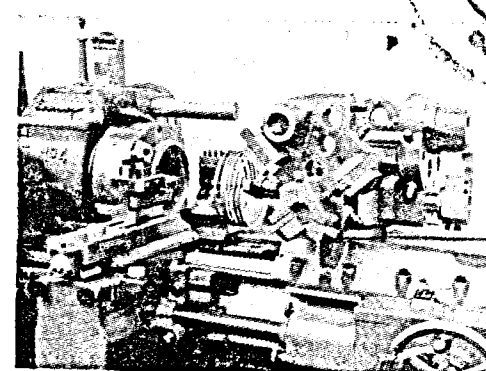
Herbert No. 4 Auto Lathe, fitted with a Herbert 15" electrically-operated chuck, set up for producing piston valve head rings from an iron casting.
